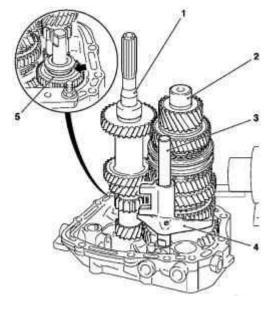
Installing the gear mechanism components: 1 - drive shaft, 2 - the main shaft, 3 - gear shift fork rod 1 st / 2 nd, 4 - gear shifting fork, 5 - reverse gear
